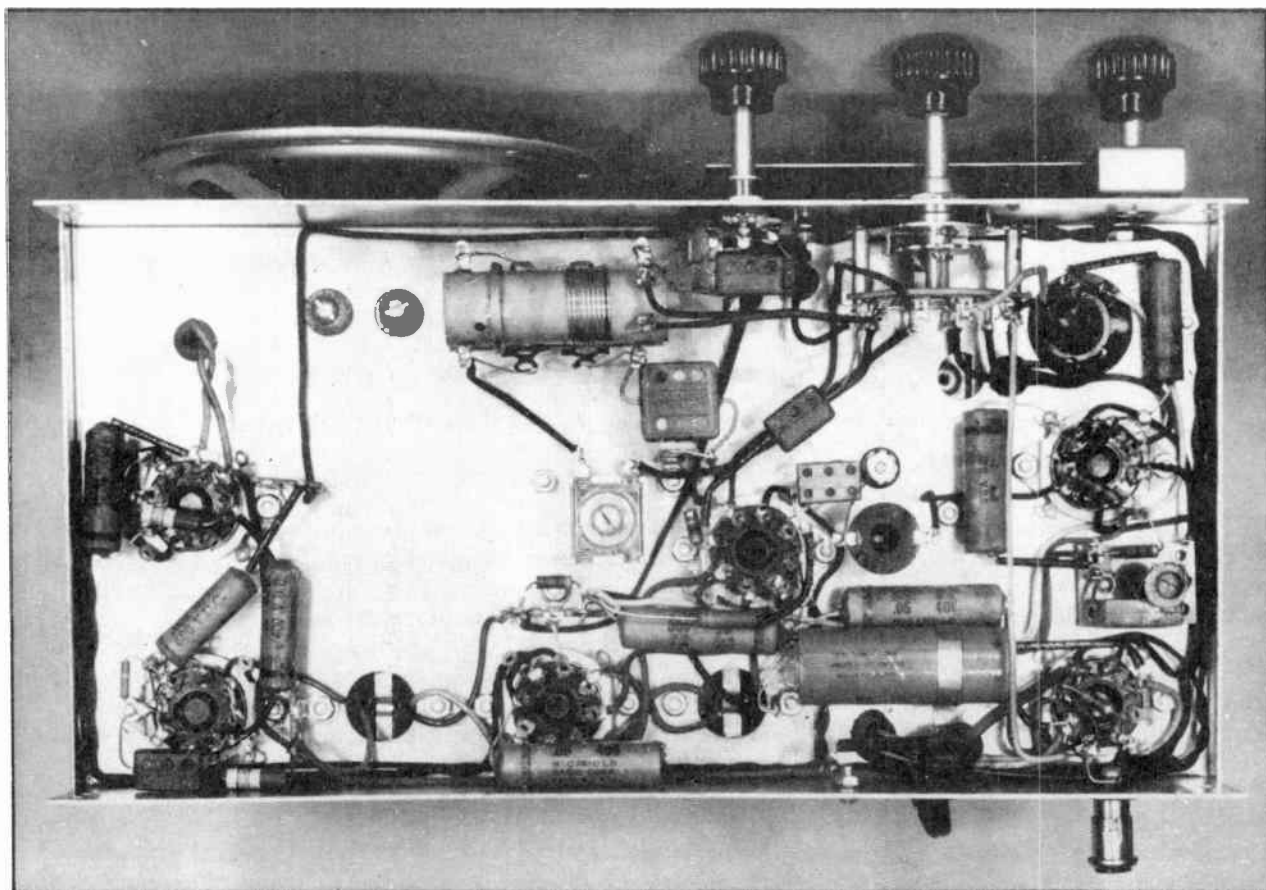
Parts and wiring underneath the chassis of a six-tube radio receiver.
